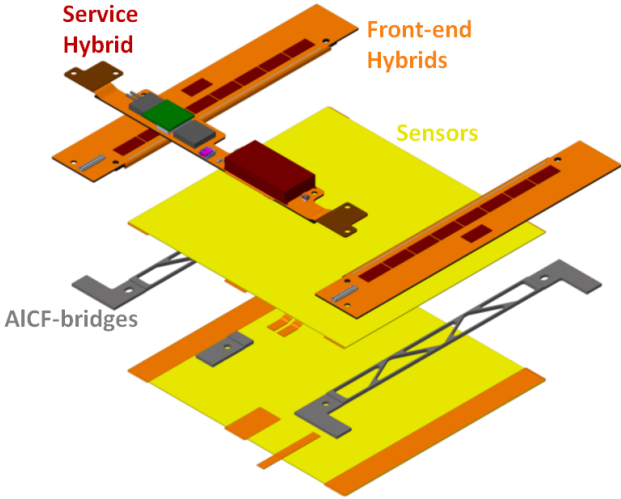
Drawing of the 2S module type. Shown is the exploded view of parts as they need to be assembled at the module assembly sites.
